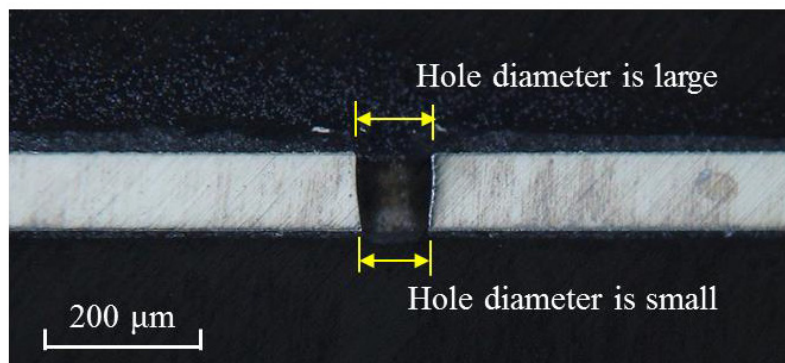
Cross-sectional shape of electric discharge machined micro-hole.
